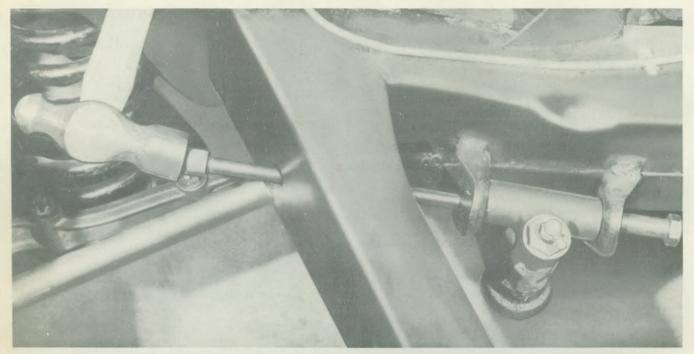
Drifting out auxiliary drop-arm bracket bolt. The same method may be employed for removal of steering box bolt.
